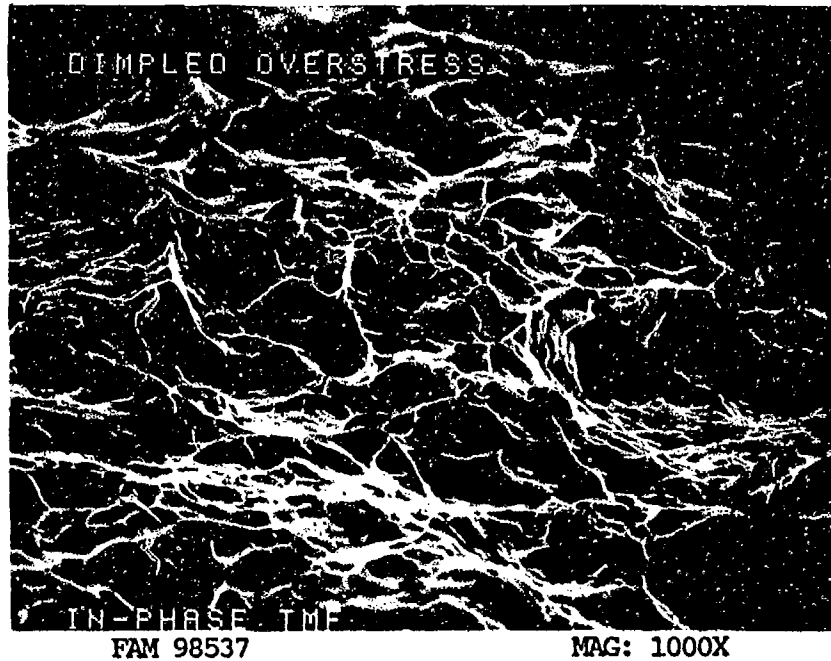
Dimpled overstress near the center of the fracture surface.
